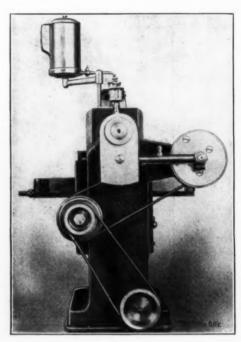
Showing Crank and Rocker Arm for Oscillating the Spindle.
